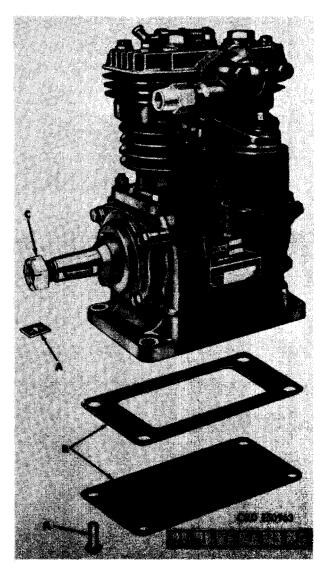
AIR COMPRESSOR ASSEMBLY WITH AIR DISCHARGE HOUSING AND AIR INTAKE MANIFOLD INSTALLED.
